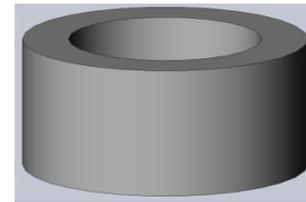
Final compression mold design. Glass slides were used as end caps for the cylinder when preparing samples.
